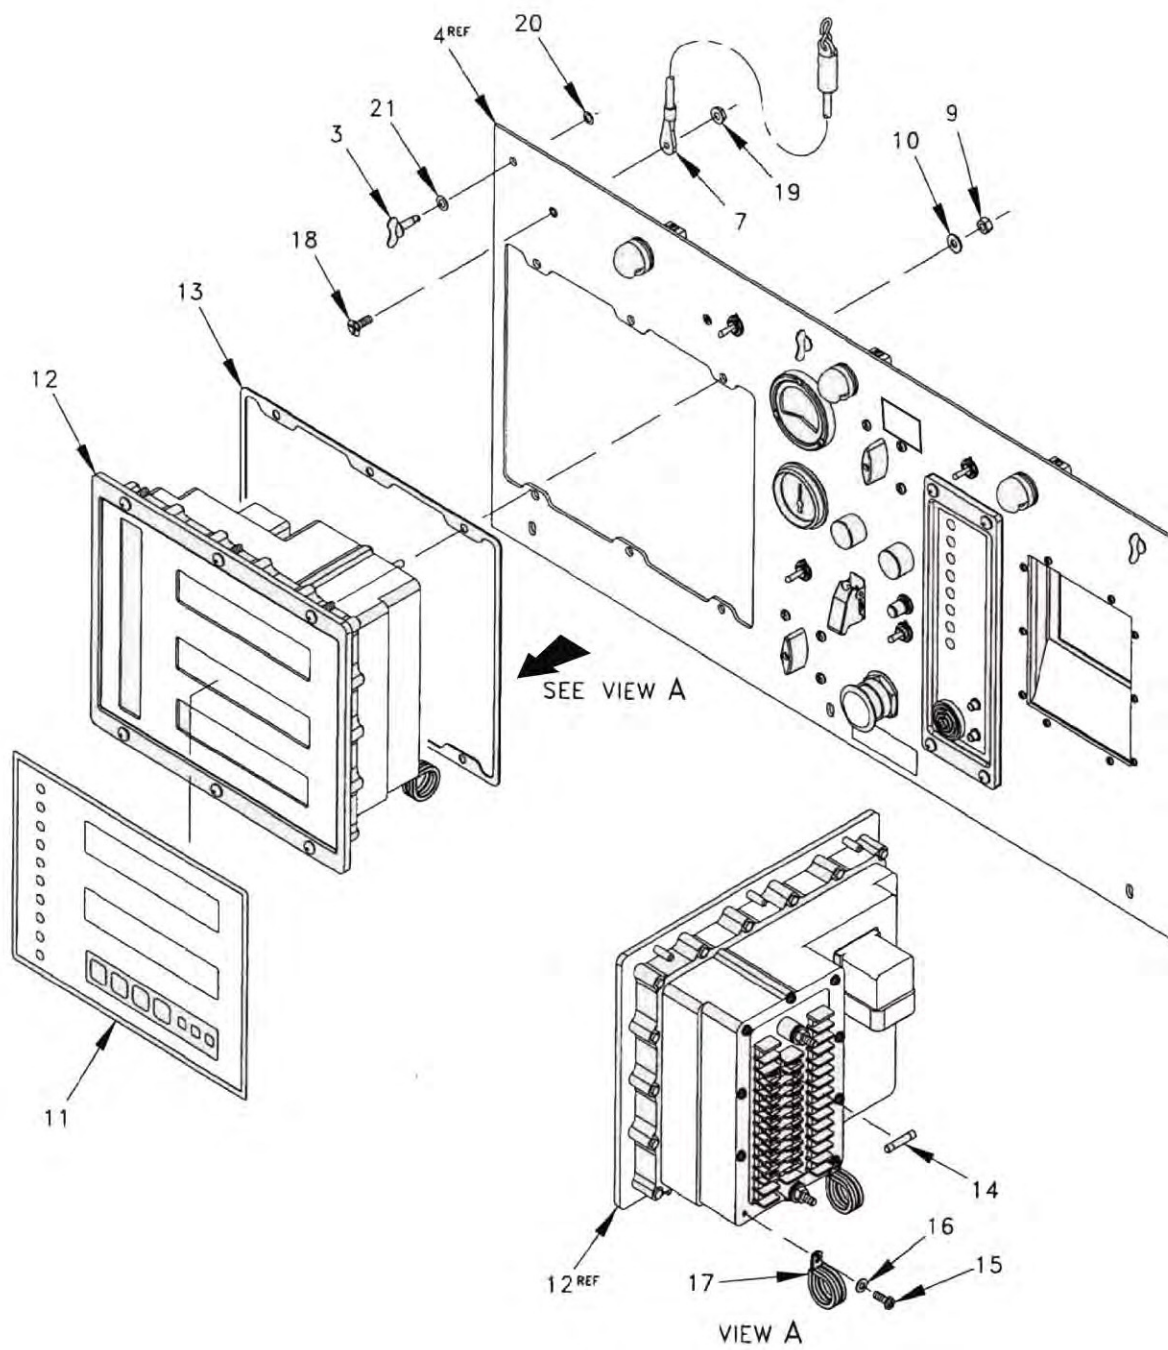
Control Box Panel Assembly (Sheet 2 of 4).
